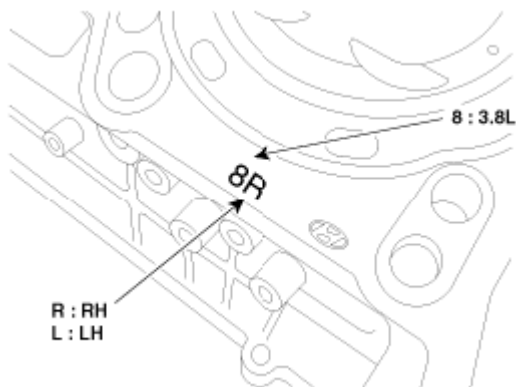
Assembling Cylinder Head Gaskets On Cylinder Block
